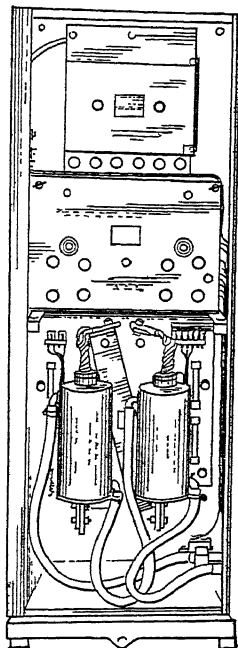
Fully Electronic Welder Control Having Precise Timing and Synchronous Firing, but without Heat Control (Courtesy General Electric Co.)
